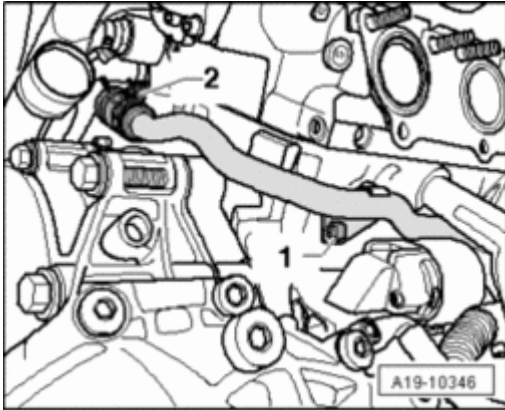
Removing Studs & Coolant Pipe From Oil Filter Housing
